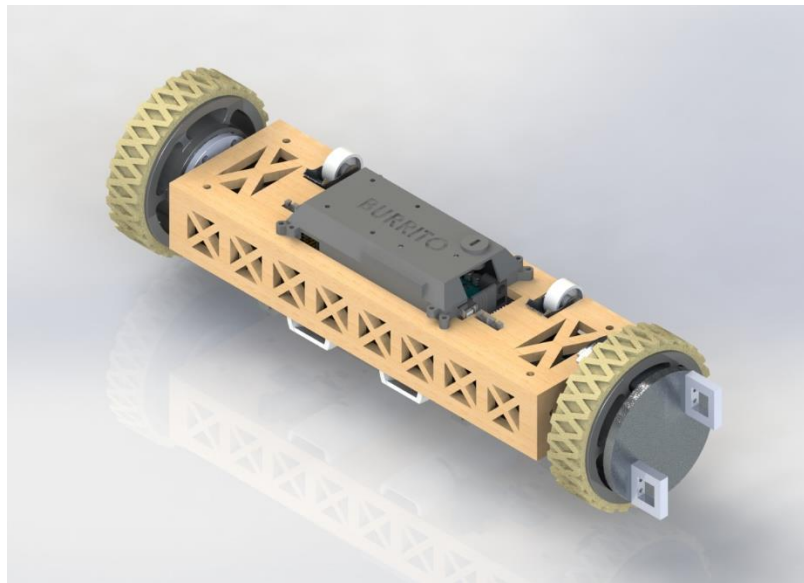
BURRITO Front View, Spring-Loaded Caster Wheels Stowed⁵
